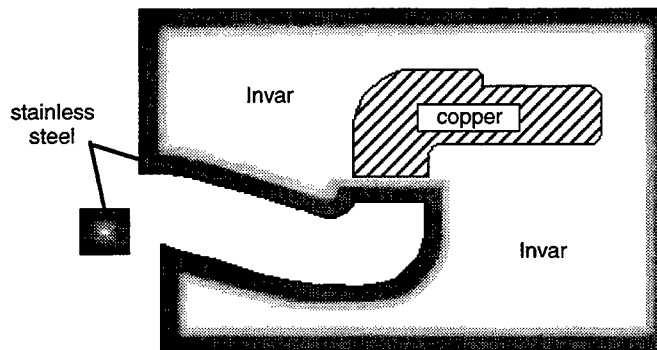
Horizontal cross-section of one half of advanced injection molding tool illustrating gradient from Invar to stainless steel on surface of part.
